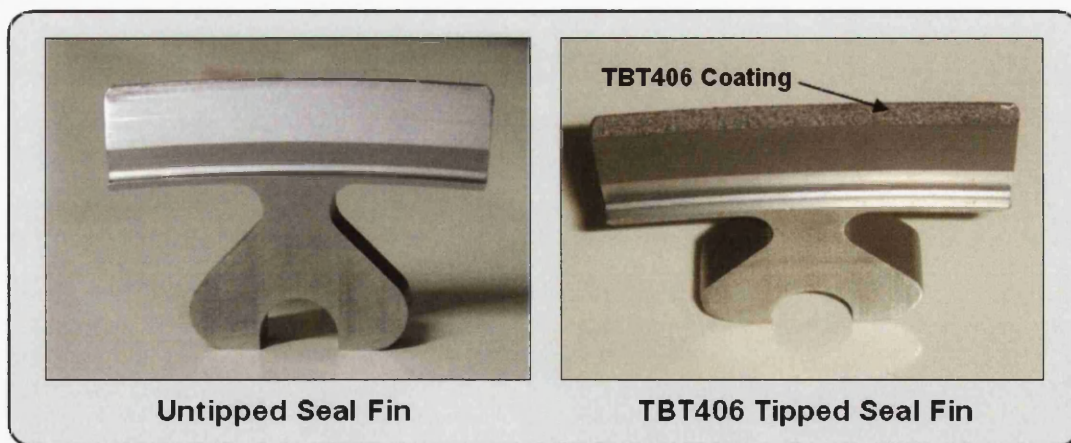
Untipped and TBT406 coating Inco 718 seal fin test pieces
